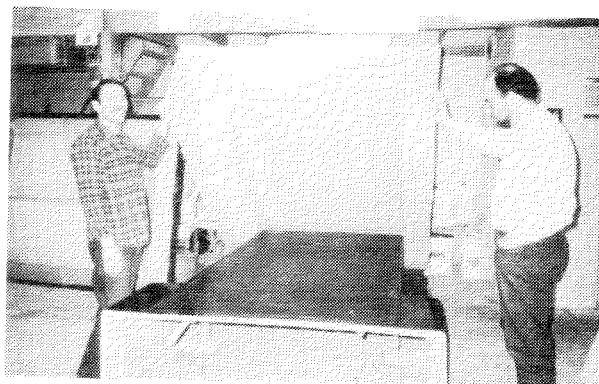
Bedliner (bottom) of the canopy unit being removed from the mold.
